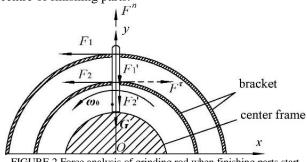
Force analysis of grinding rod when finishing parts start rotating
